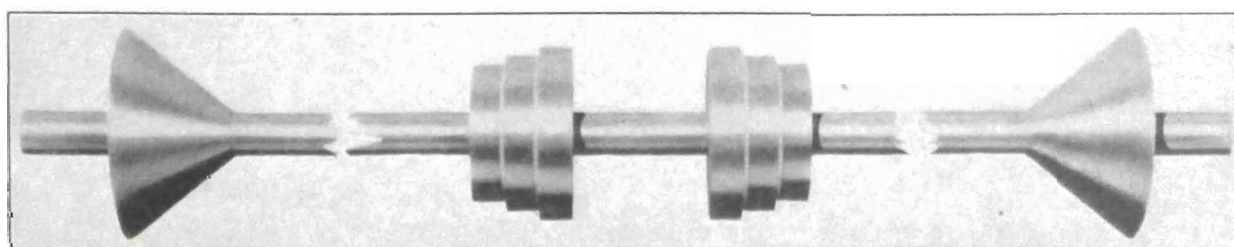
Axle Housing Alignment Tool, J-1105
